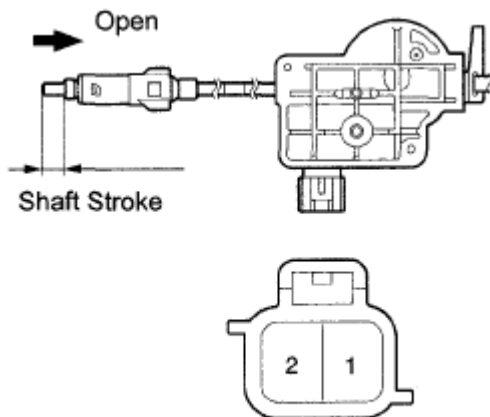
Inspecting Fuel Lid W/Motor Lock Assembly
